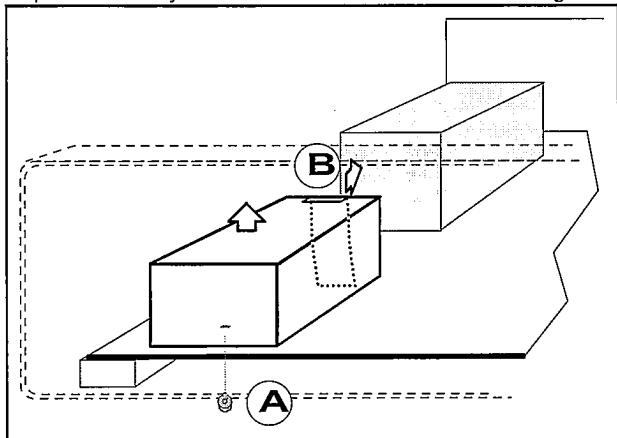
A clip and a screw hold the oven oscillators in place.
